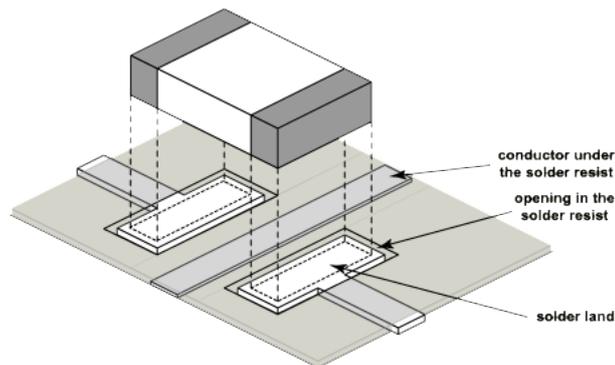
solder resist on a printed wiring board, source: Epectec [4]
